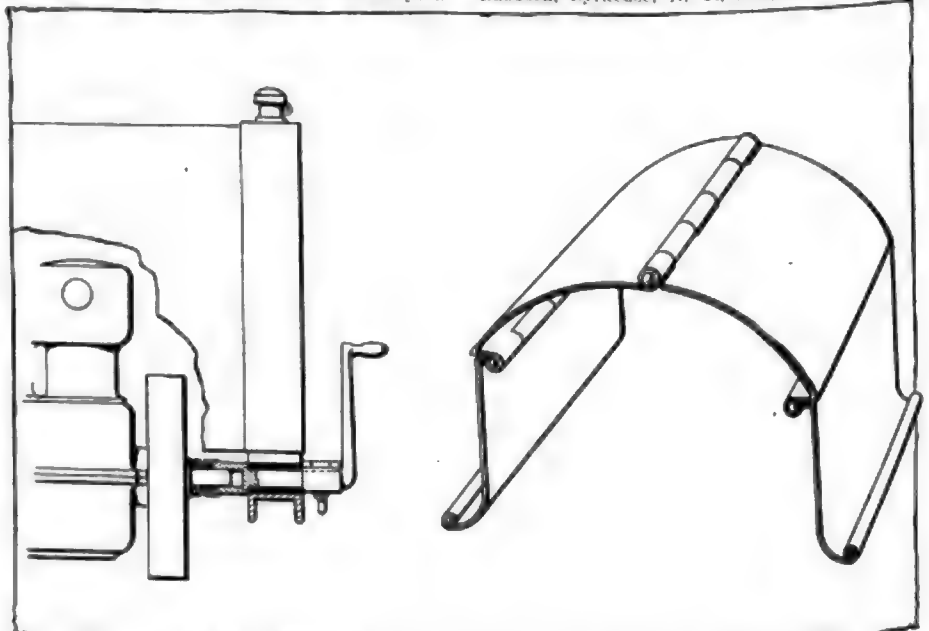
DAVIS CRANK LOCK AND BRISCOE HOOD
